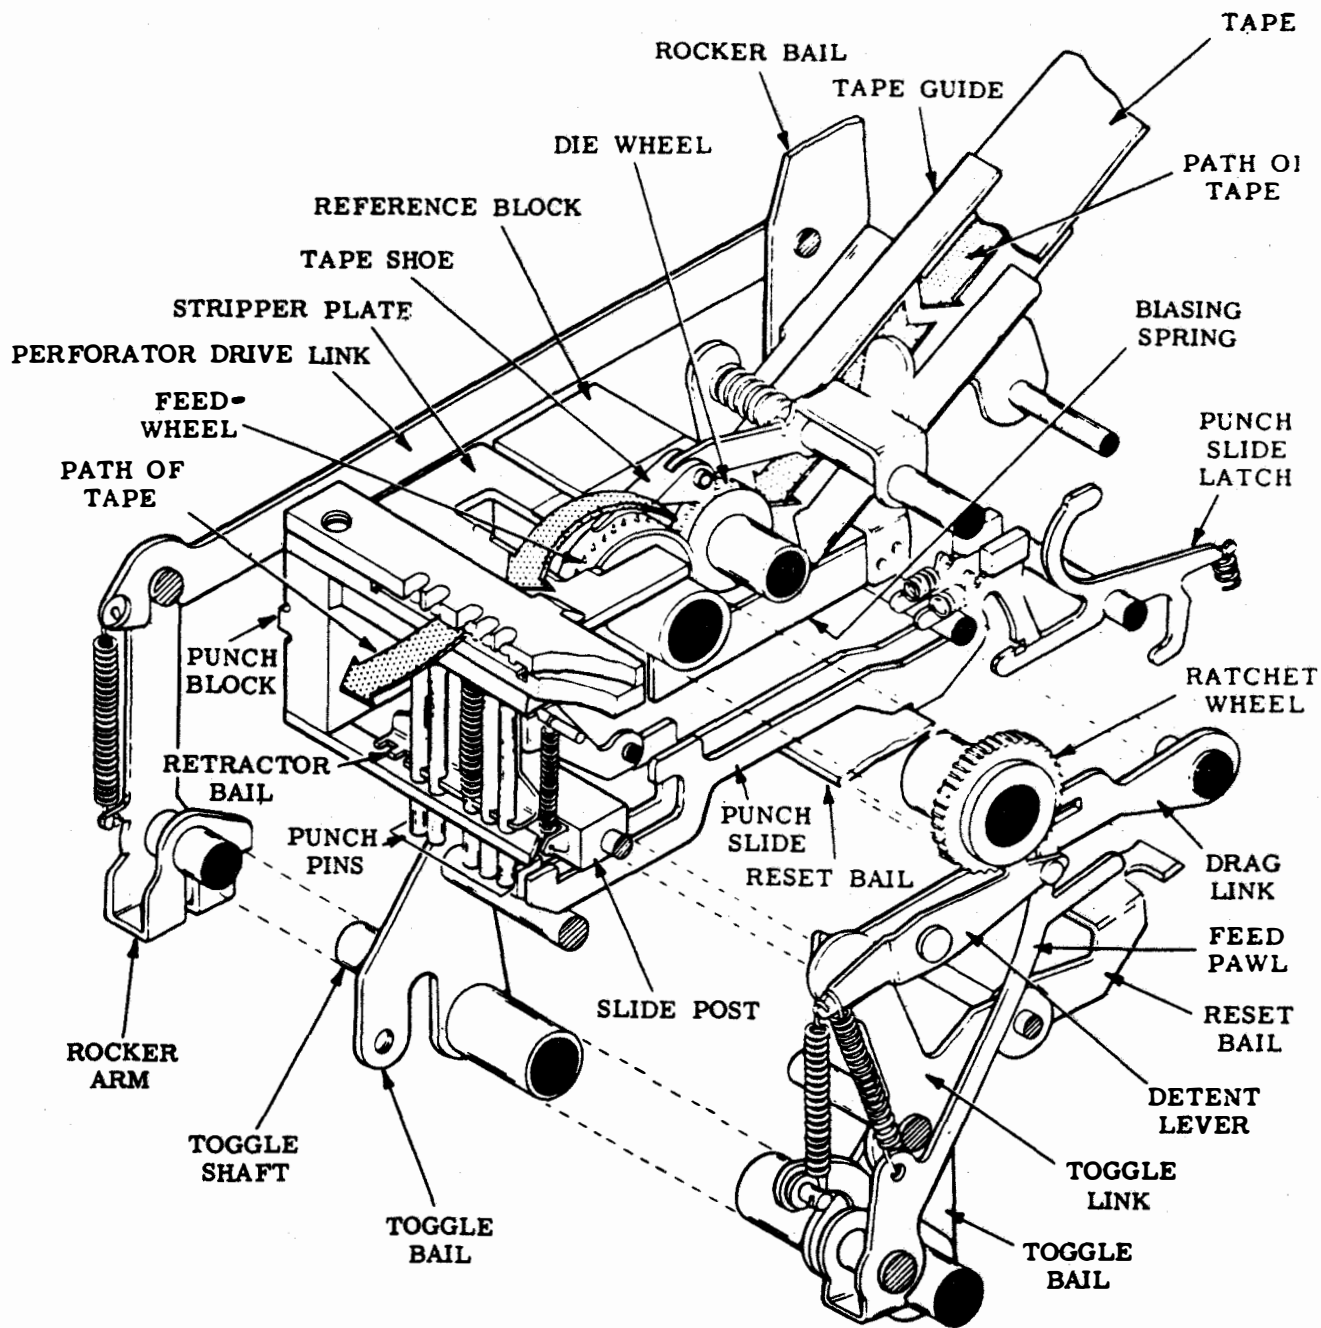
Perforating Mechanism - Chadless Tape Unit
